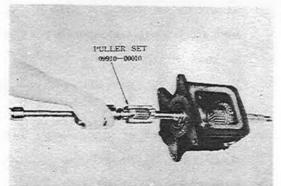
, Removing the front bearing from the transmission case with special-tool.
